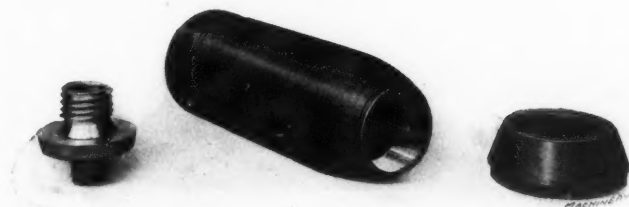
Examples of Pieces threaded on Taft-Peirce Machine
